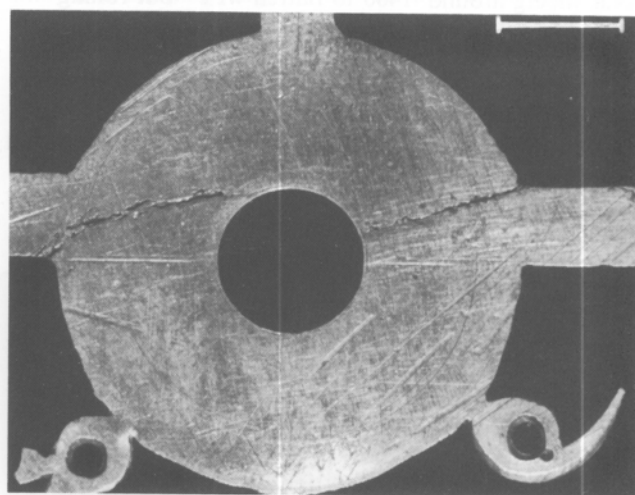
Photograph of the back of the rete showing surface defects in the brass sheet and traces of the scribe lines used to lay out the part before it was cut out. The parts of the astrolabe have been cut from the sheet so that all the defects are on inside surfaces and are not visible on the assembled instrument. Length of the scale bar is 5mm.
